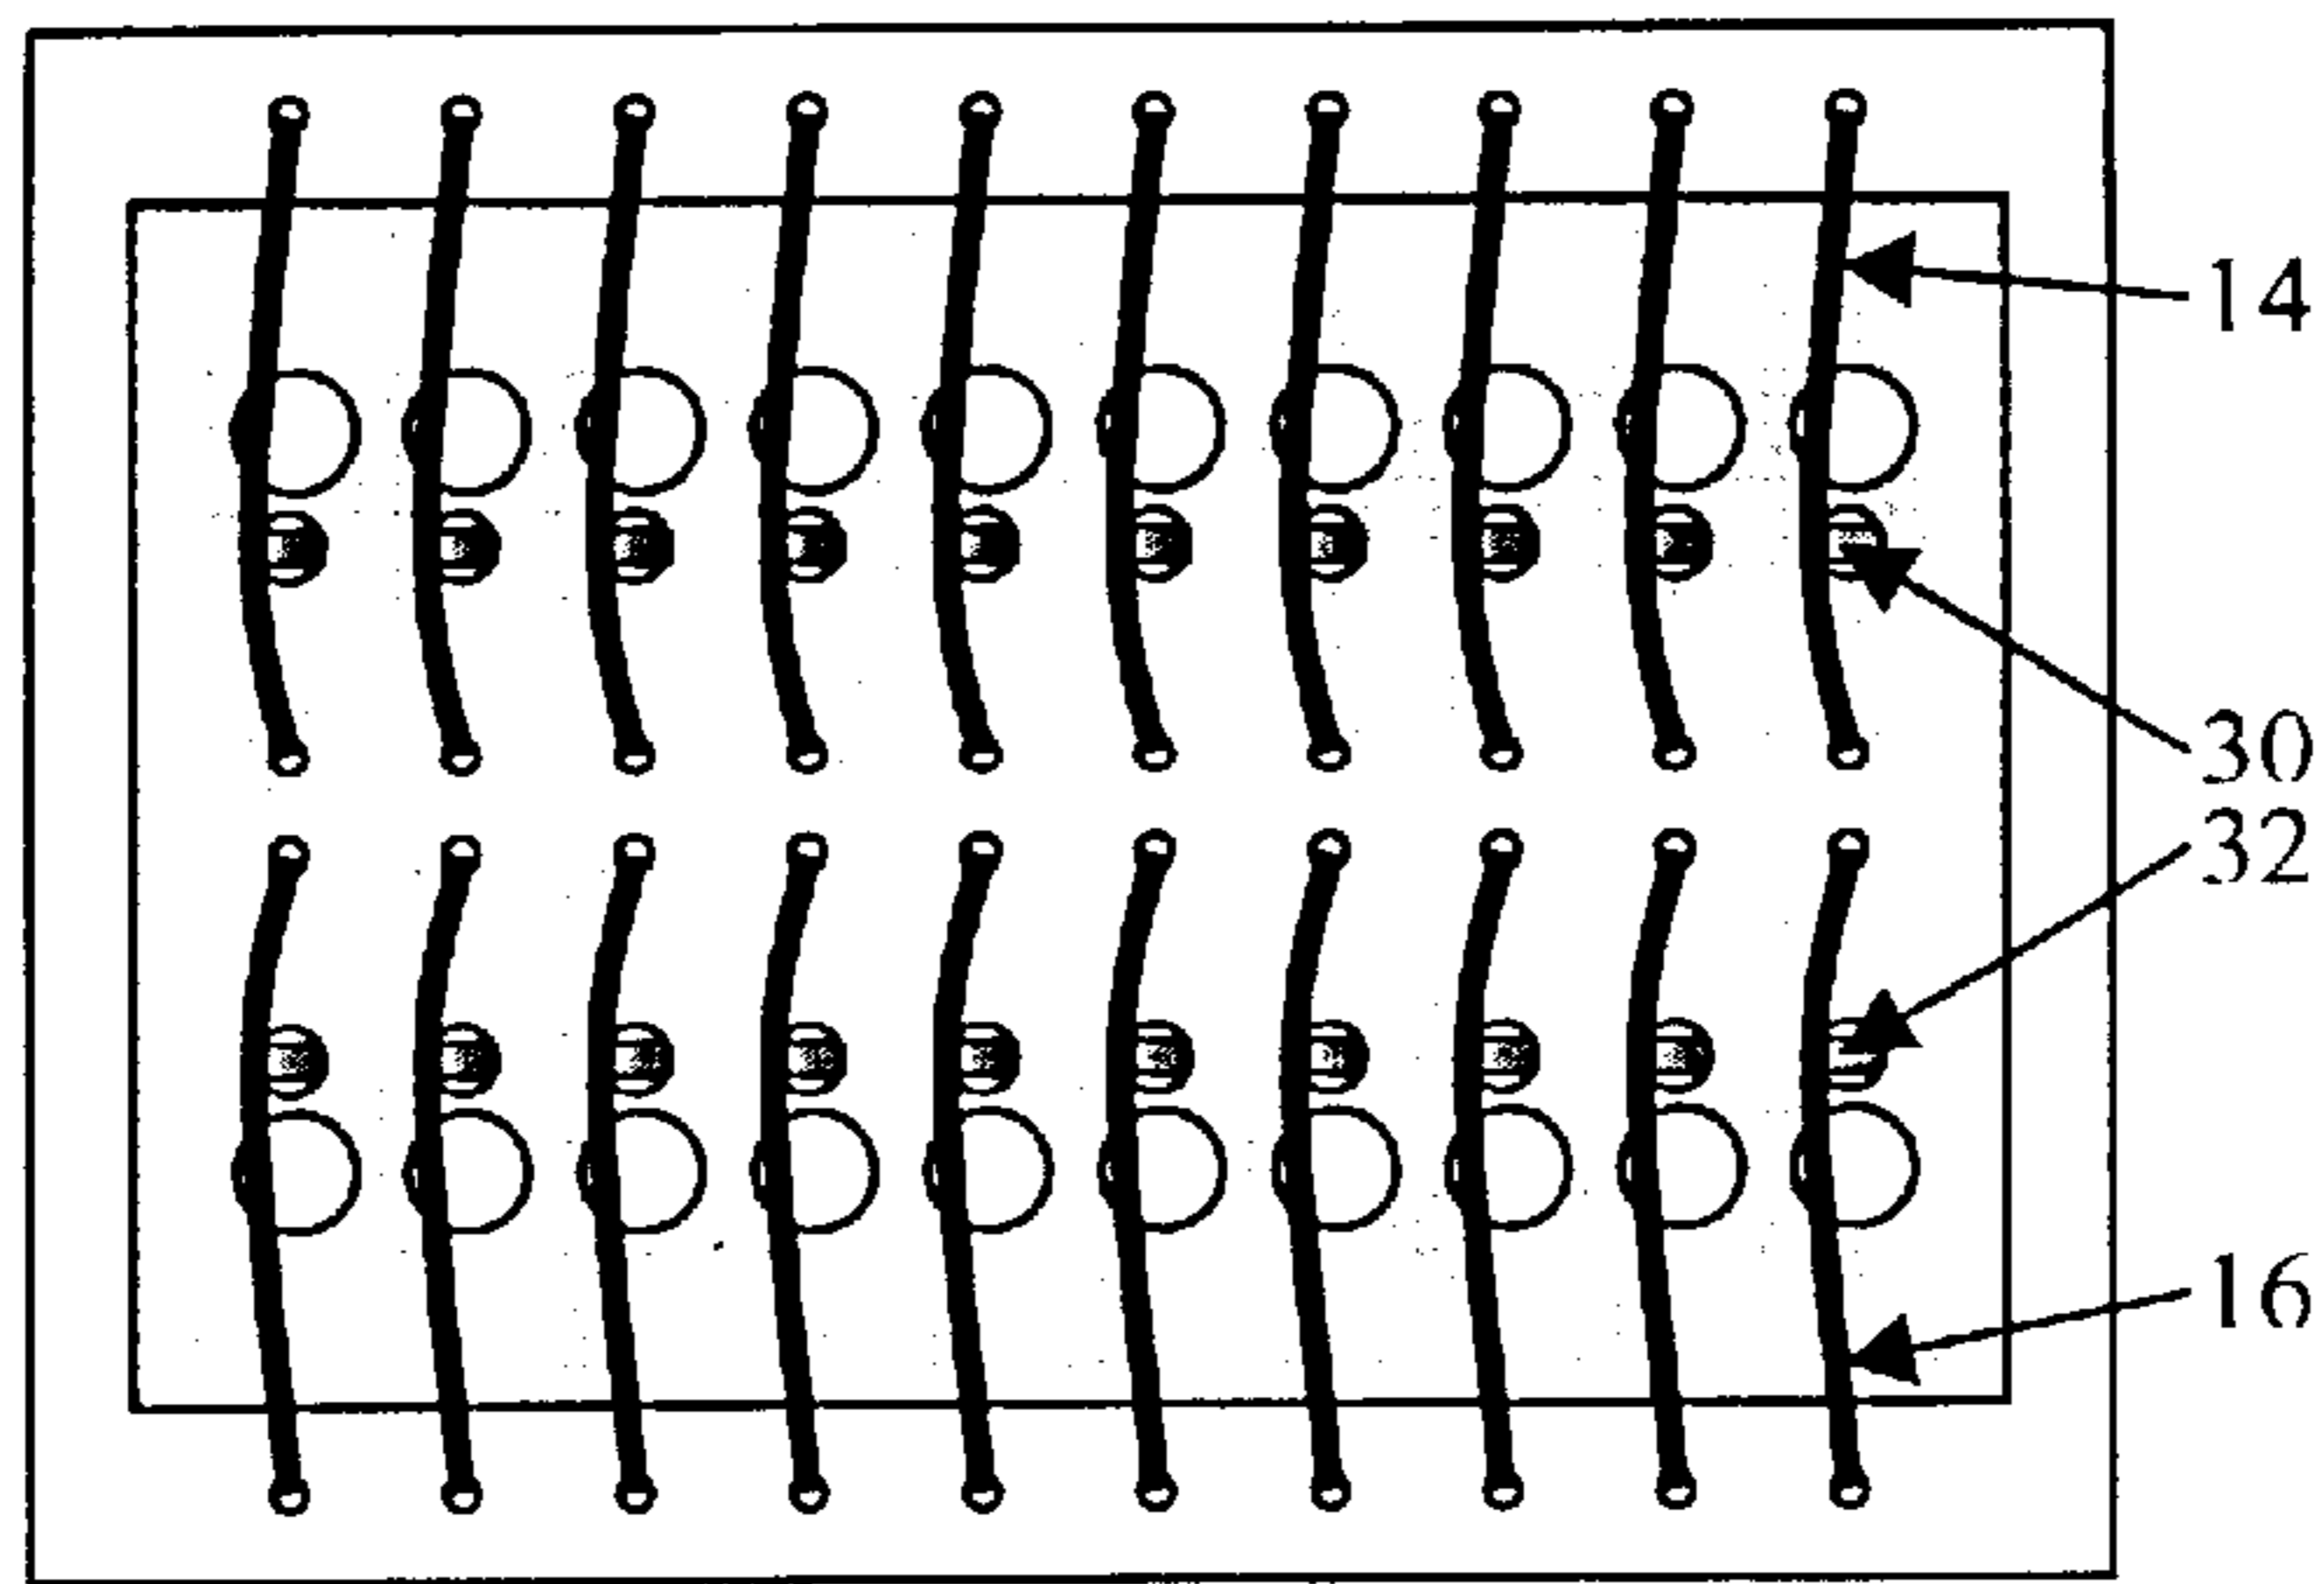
Engaged Position – UUT mated with new ZIF socket and Actuator 1 removed
